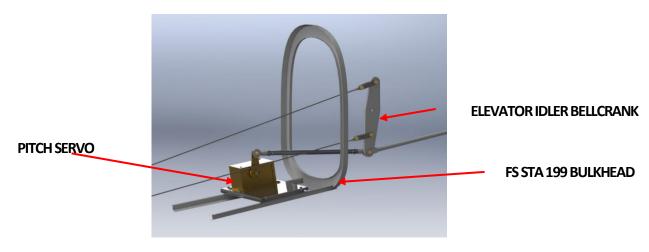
CESSNA 182 PITCH SERVO INSTALLATION LOCATION
